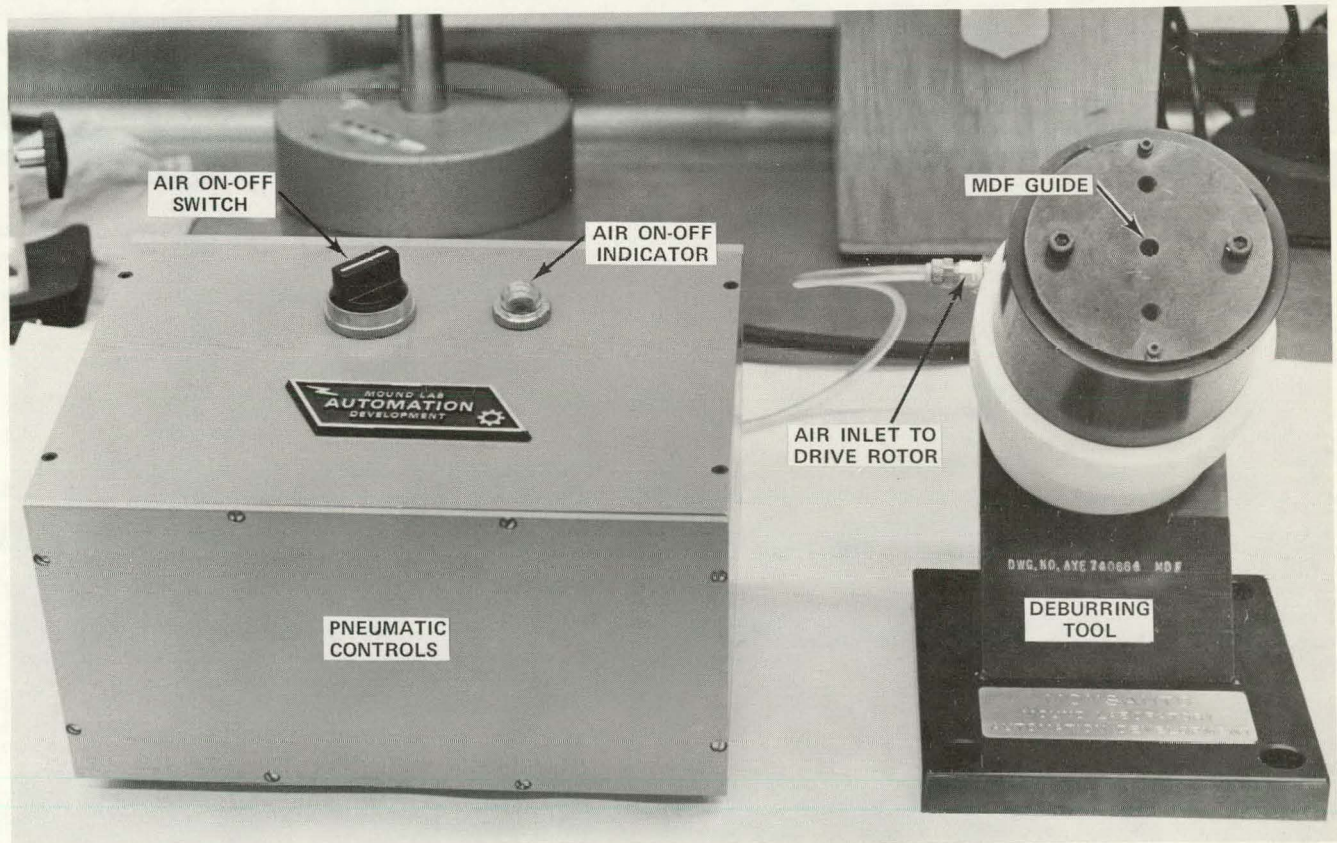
Operator's view of the deburring tool with its ancillary pneumatic controls.
